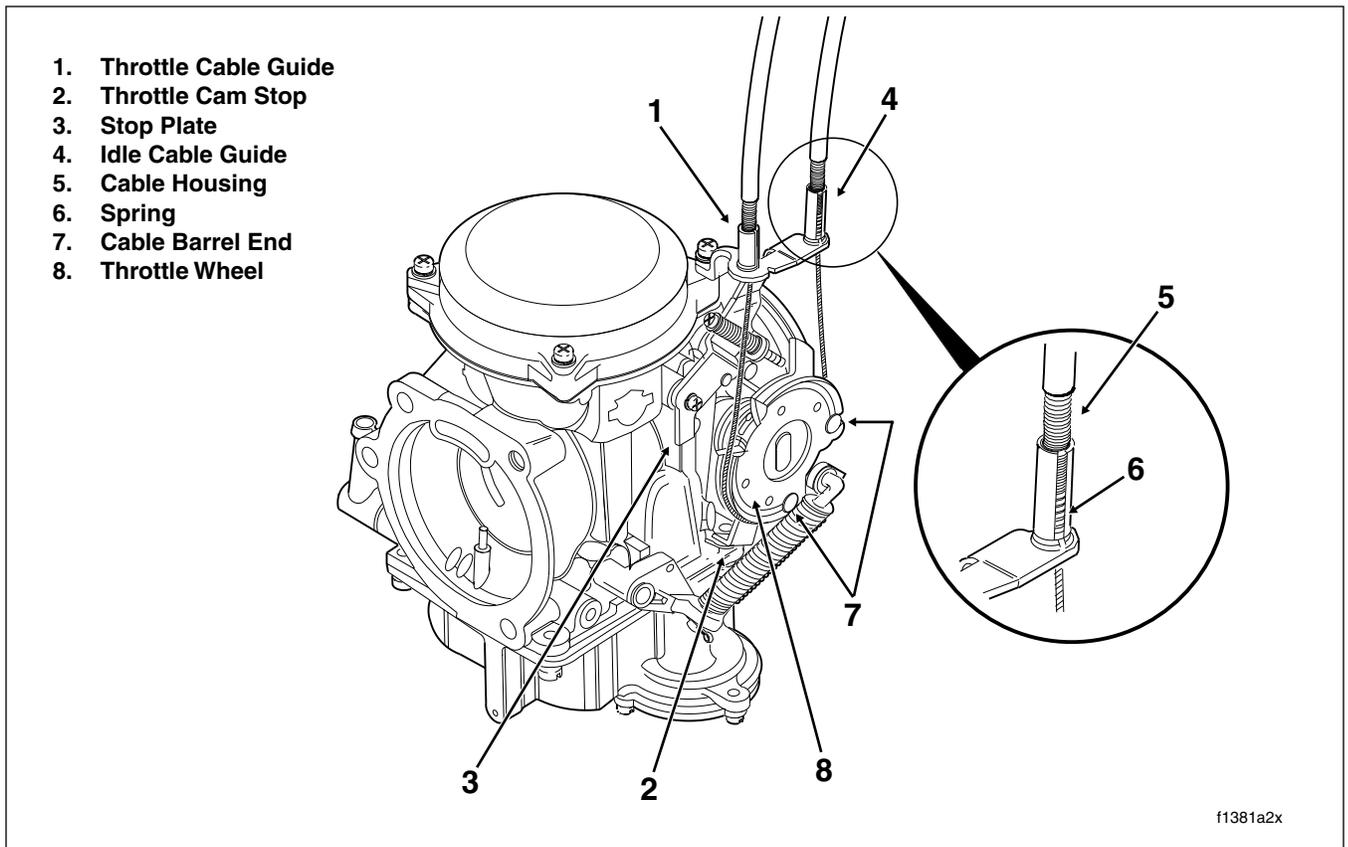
Throttle Cable Assembly - Carburetor Side
